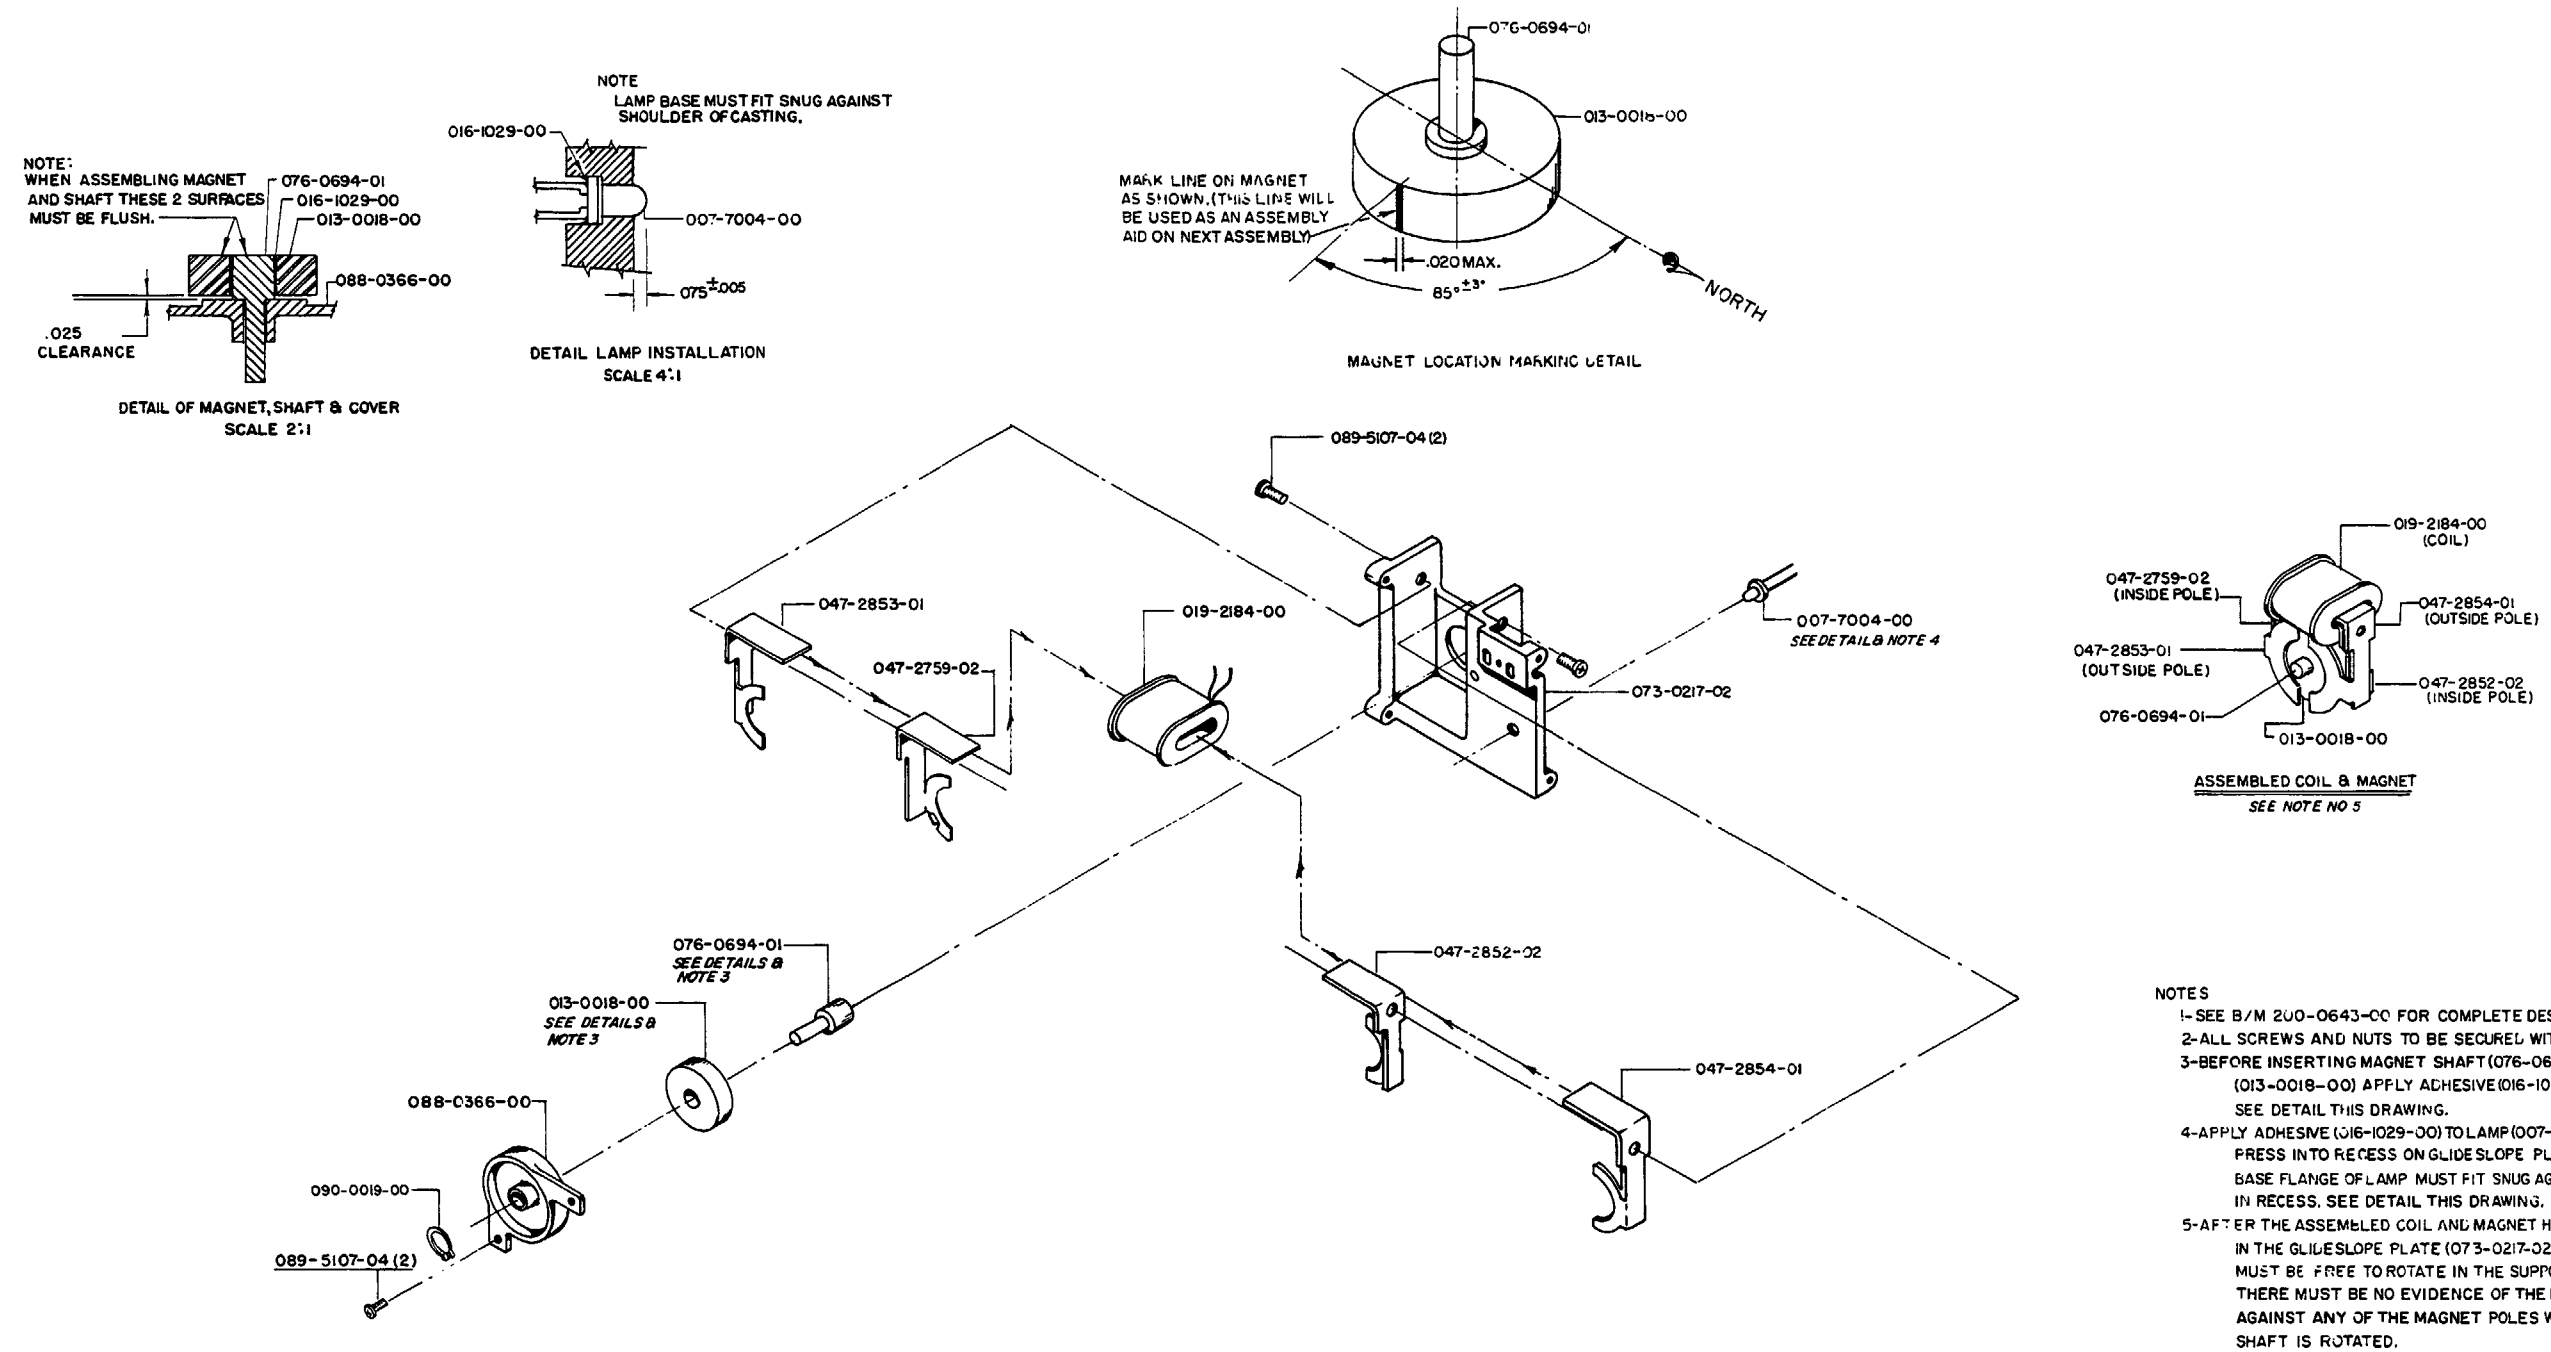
A KI 525 GLIDE SLOPE PLATE ASSEMBLY
